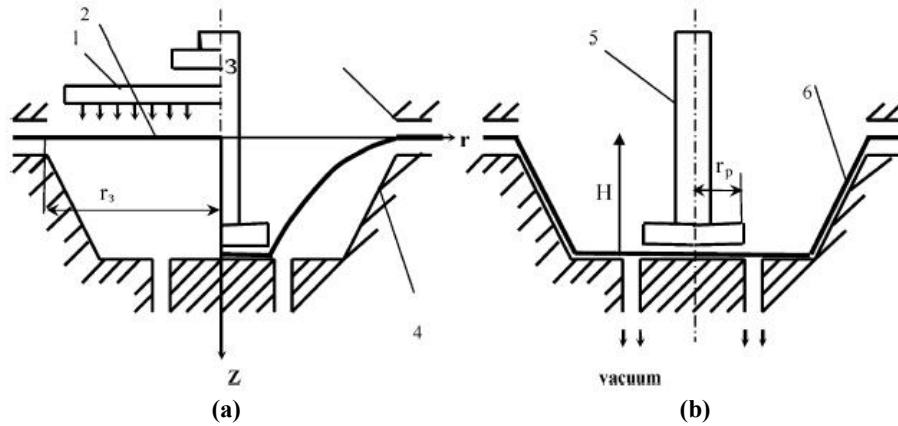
Plug Assist Vacuum forming, (a) heater and (b) vacuum forming [Hosseini, 2006]
